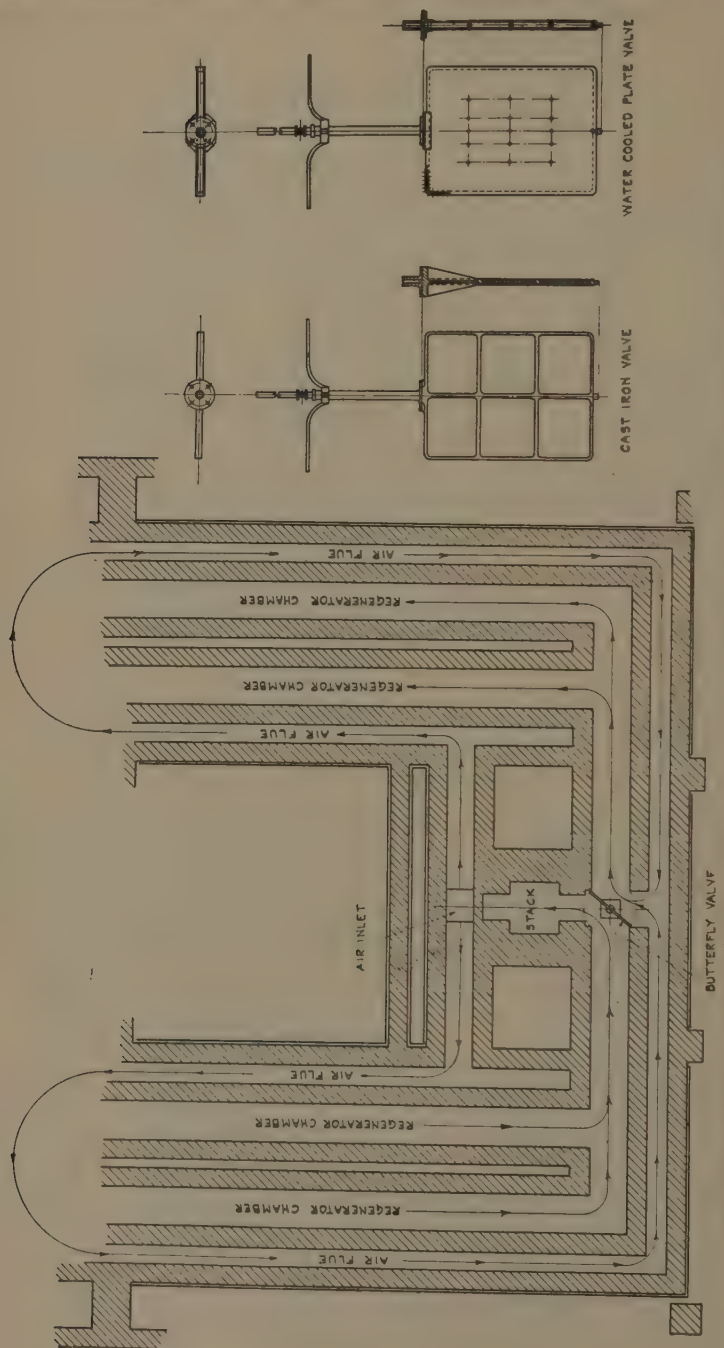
Reversing valve and flue arrangement, Homestead Steel Works, Carnegie, Phipps & Company, 1889.
